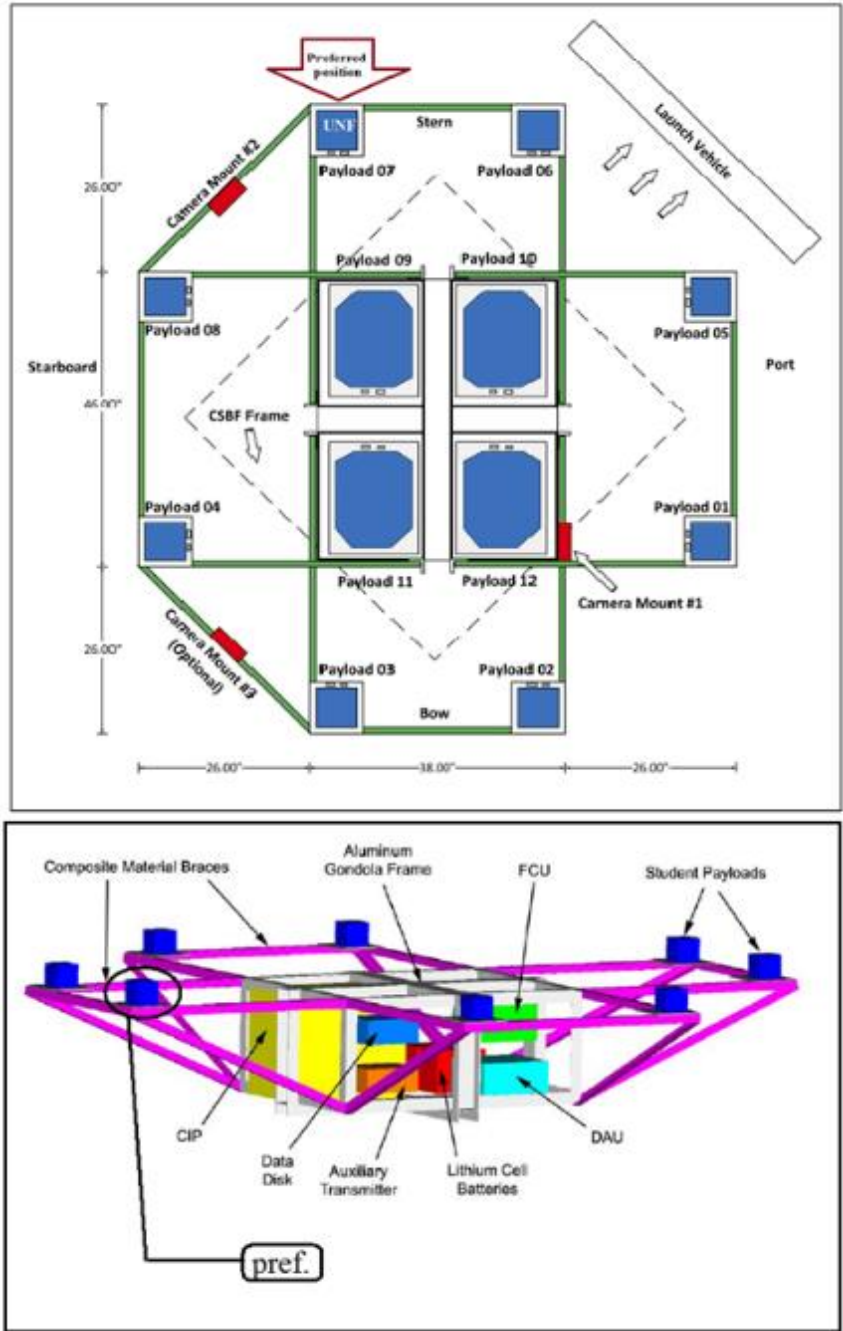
(a) Top view (b) side view proposed HASP Configuration
